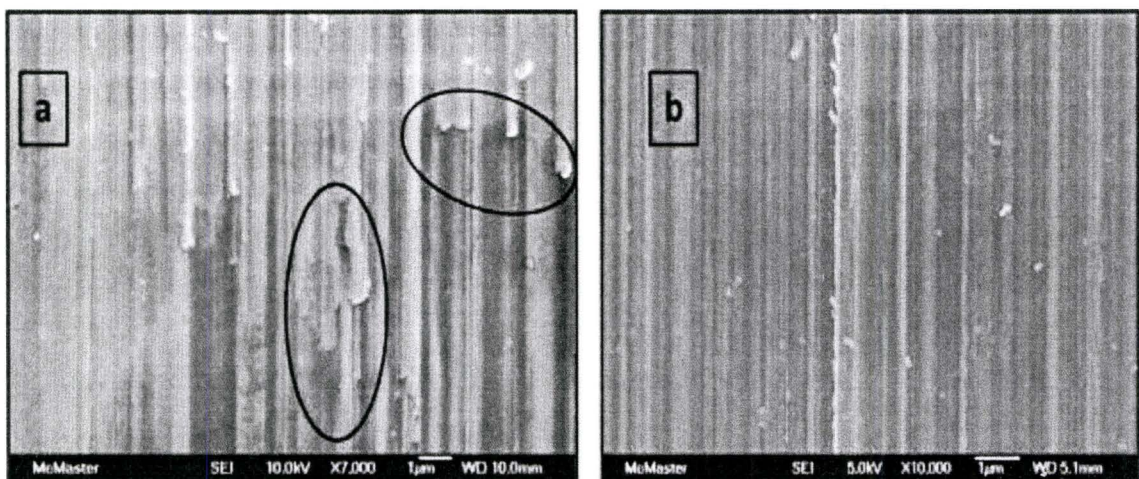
CP-Ti machined surface: (a) No coat and (b) PFPE
